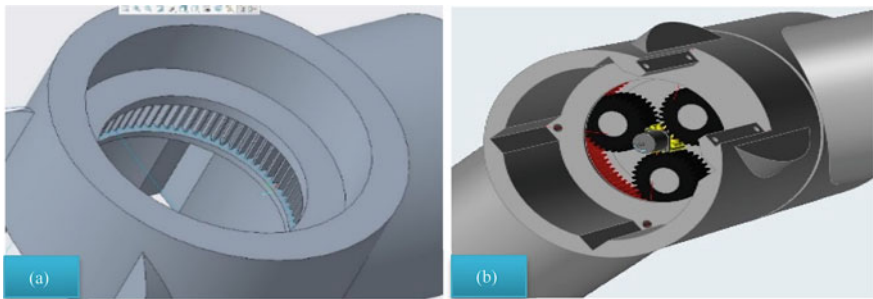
Joint configuration: a ring gear design using DfAM technique and b assembly of inbuilt epicyclic gear train inside link
